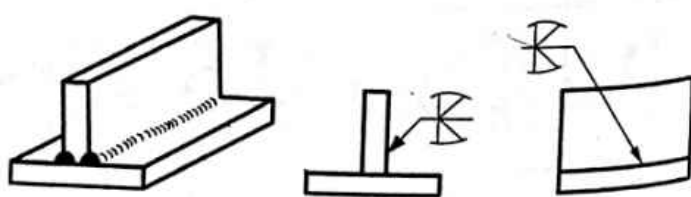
Double bevel butt-arrowhead indicating plate to be prepared
